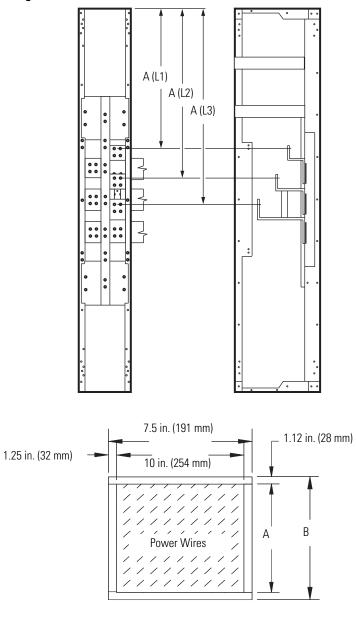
Mounting Dimensions for 10 in. Wide Section with 10 in. (254 mm) Incoming Line Section
